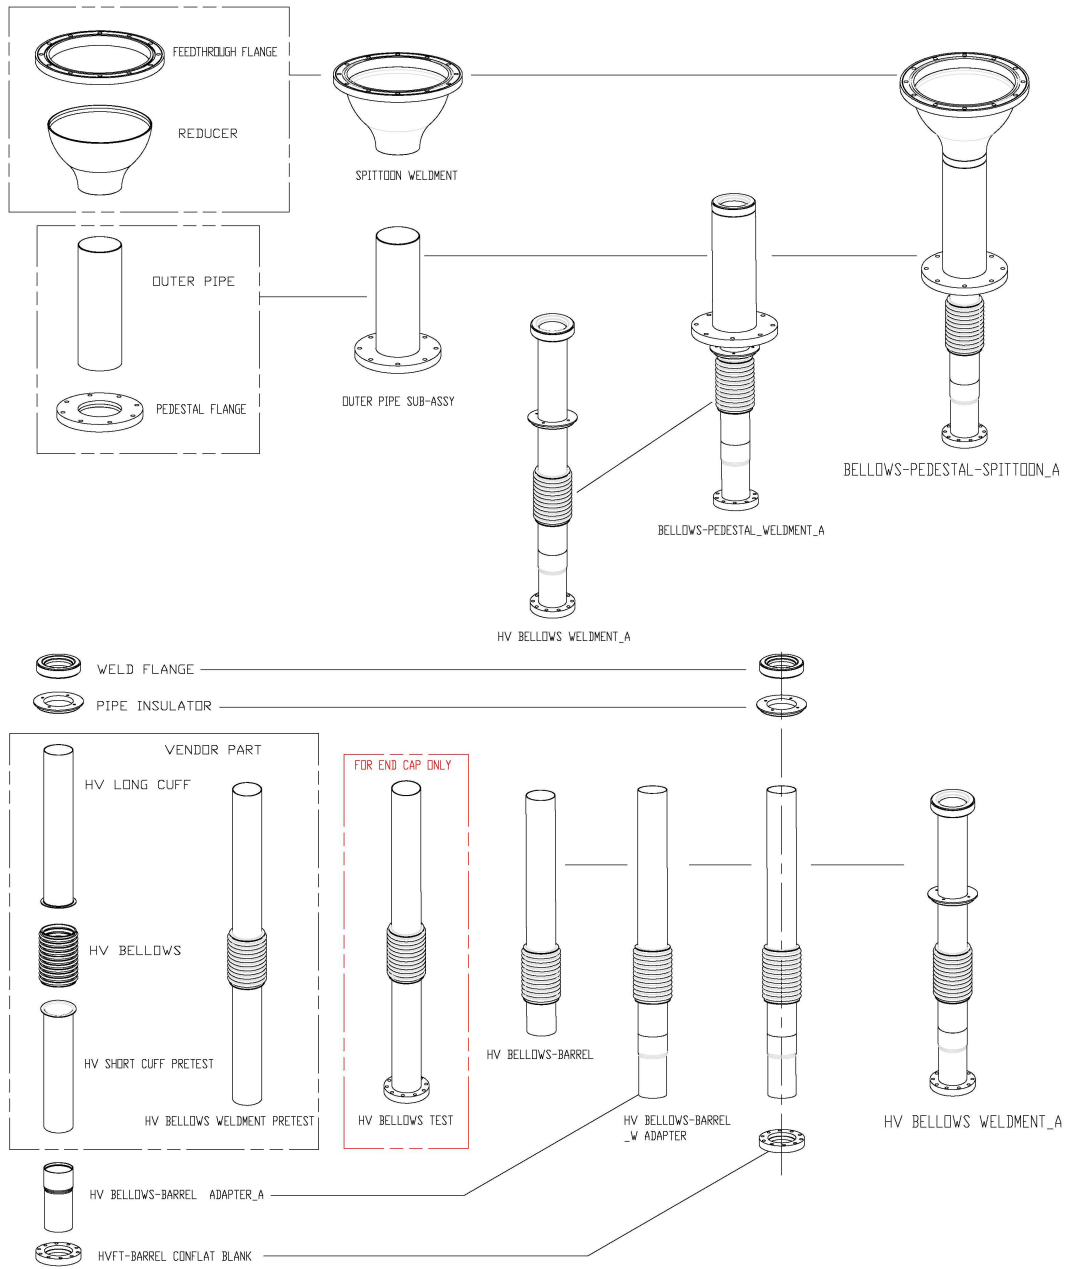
Assembly tree of a HVFT port: cold pipe and bellows (below). Assembly of the warm parts: pedestal, outer pipe, reducer; and the final port assembly (above).
